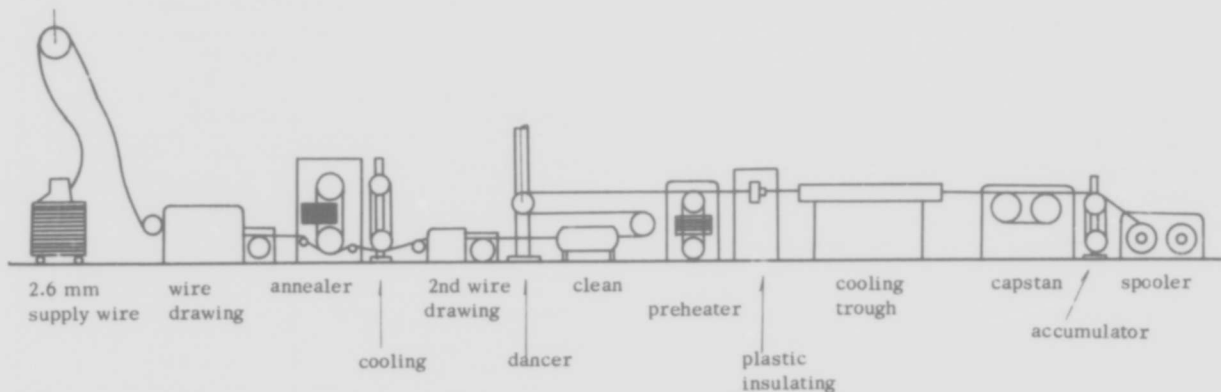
An example of manufacturing line of aluminum conductor cable
